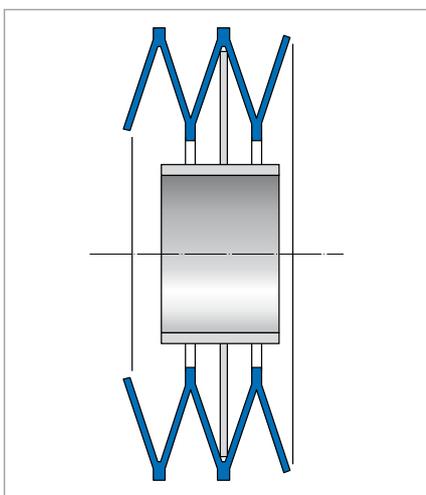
Disk Bellows with spindle drives for horizontal installation
